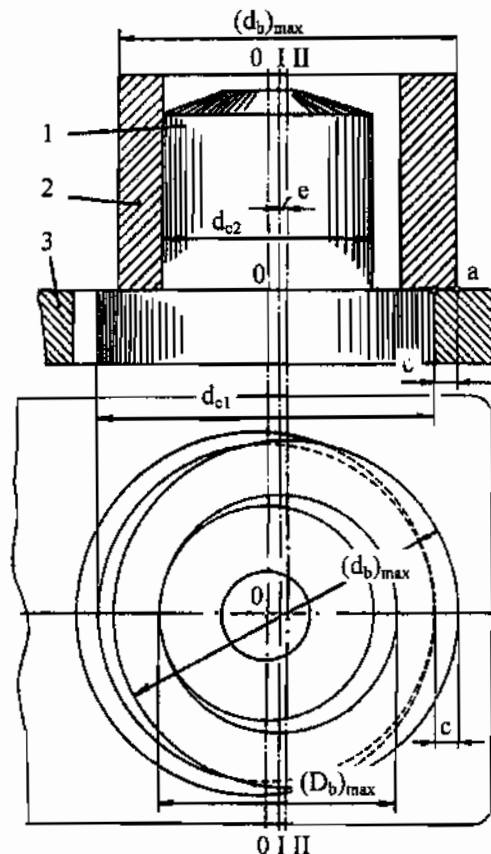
Limit Situation at Plate – Jig Bush Type Parts Assembling
